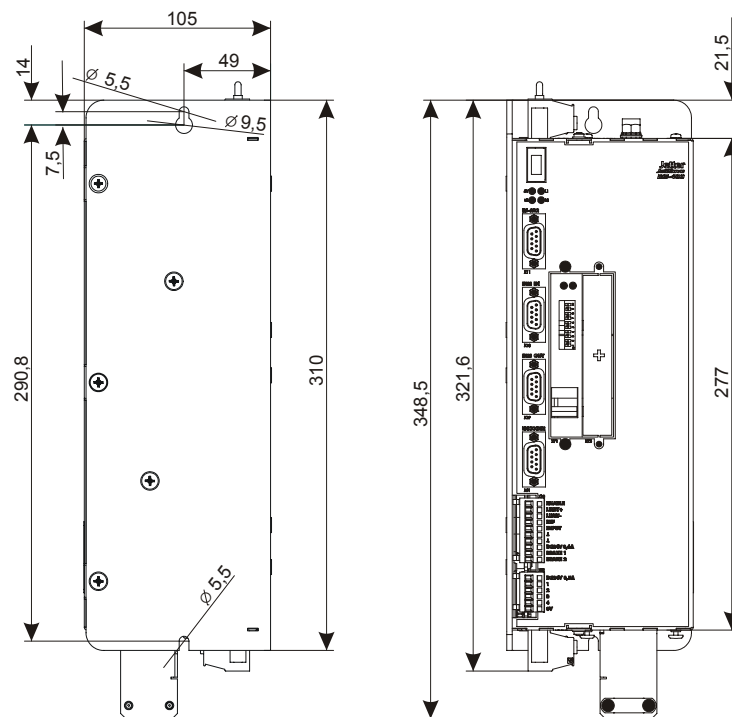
Rear and front view of the JetMove 215-480 enclosure with mounting holes
